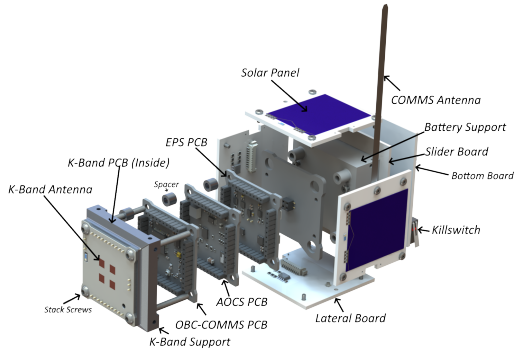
Exploded, labeled, render view of ^{Po}Cat-3
